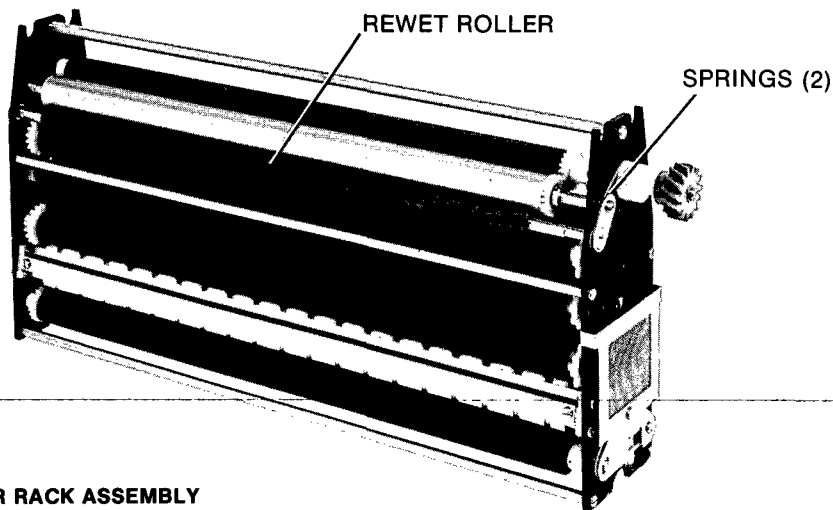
DEVELOPER RACK ASSEMBLY
